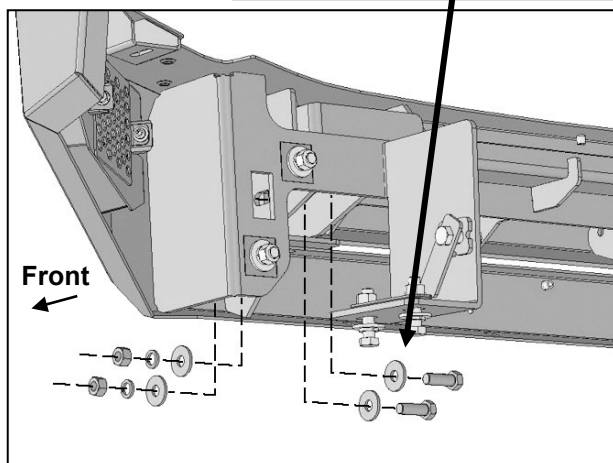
Driver/left side of Winch Tray and Bumper pictured from below
